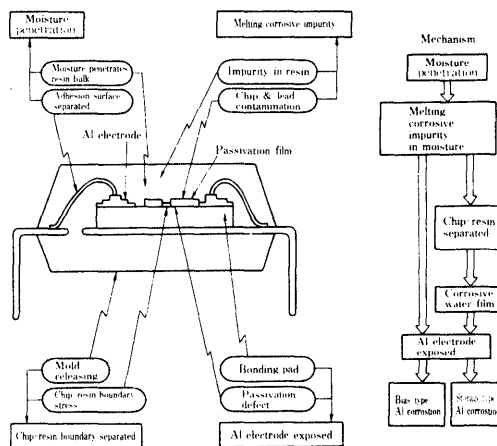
Plastic package cross section and Al corrosion mechanism
